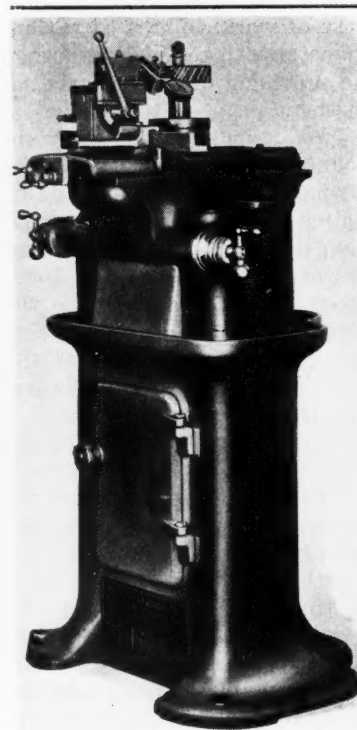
Lees-Bradner Spur and Helical Gear Testing Machine
